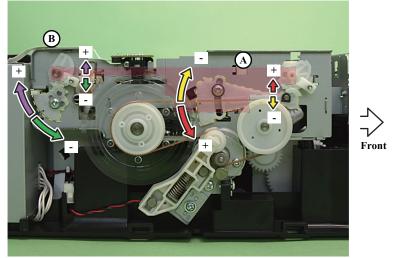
Operating the parallelism adjustment bushing (Left side)
